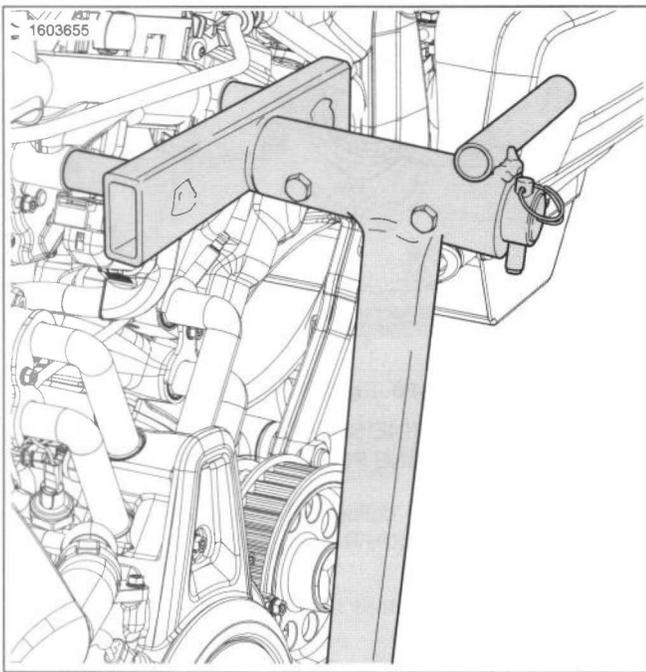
Powertrain R&R Fixture Installed (Outboard Side)
